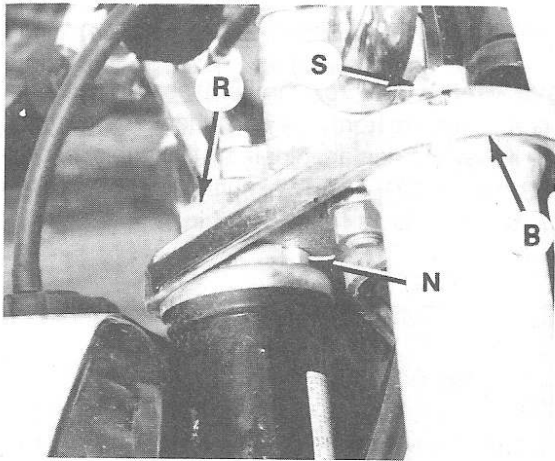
View of steering head assembly. Rotate slotted nut (N) to adjust steering play.
